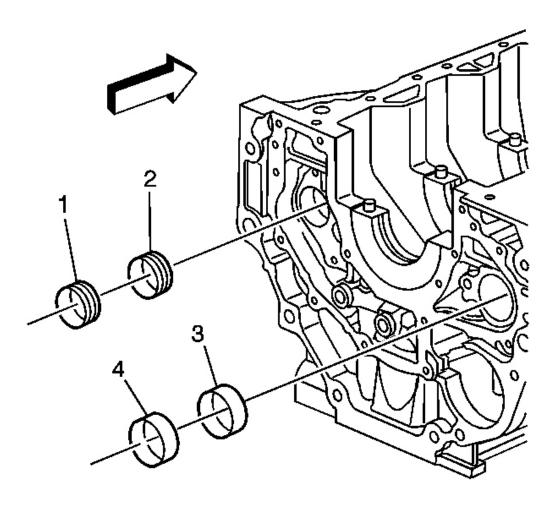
Identifying Front & Rear Bearings Courtesy of GENERAL MOTORS CORP.
